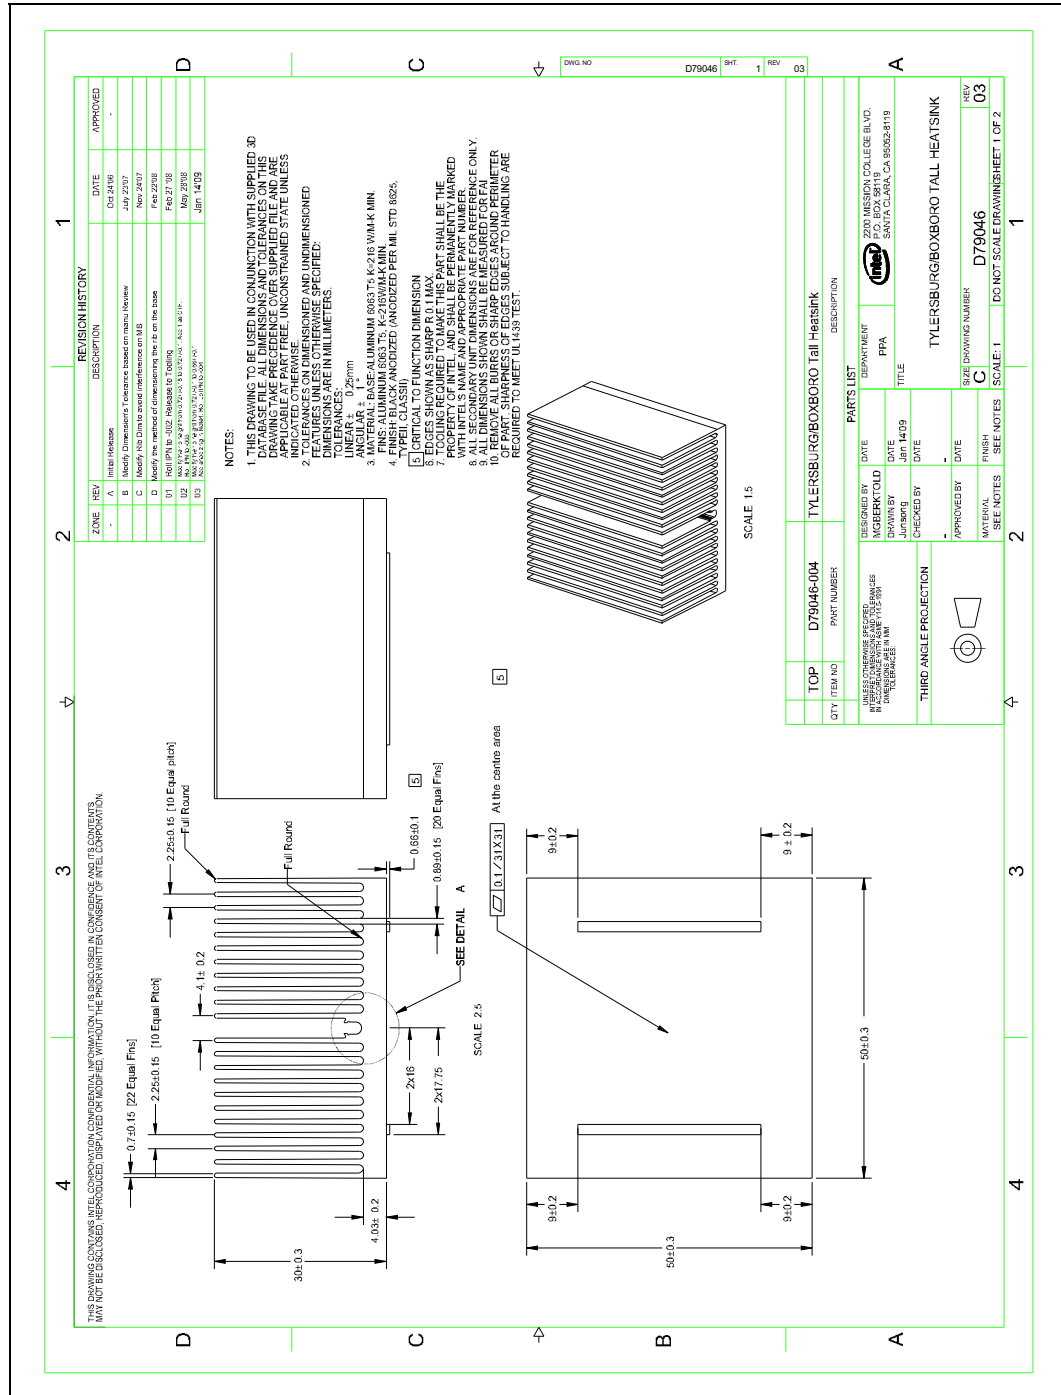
Tall Torsional Heatsink Drawing 2 (2 of 2)
